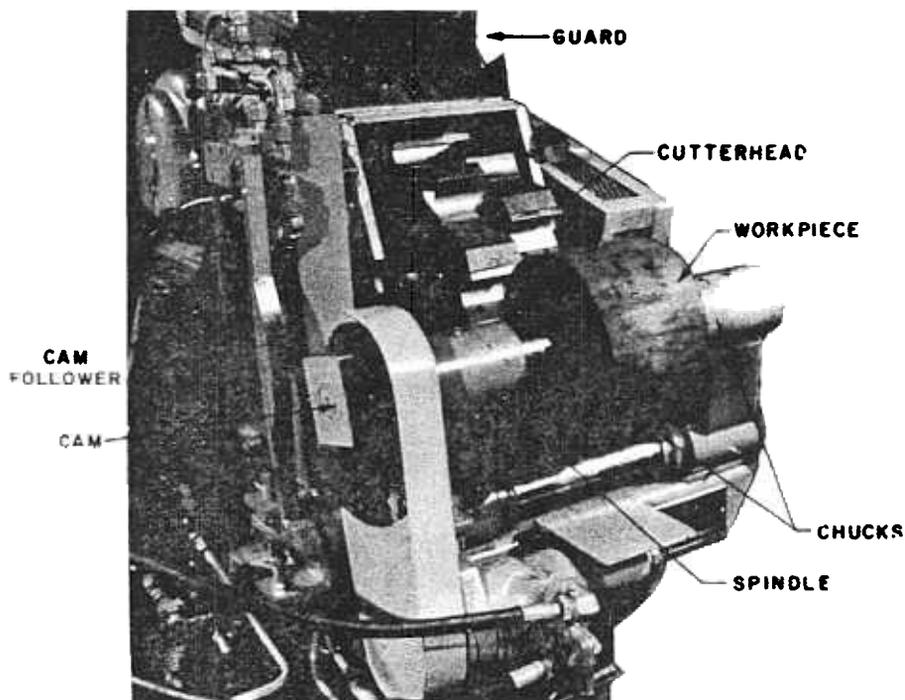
Second Prototype of Koch Shaping-Lathe Headrig with 10-Knife Flaking Cutter in Place. Cam Is 4 in. Square. The Bolt, When Machined, Will Also Measure 4 in. Square.
